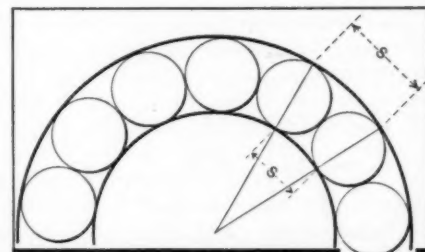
Diagram illustrating proportional thickness of metal in outer and inner races of an annular ball bearing
